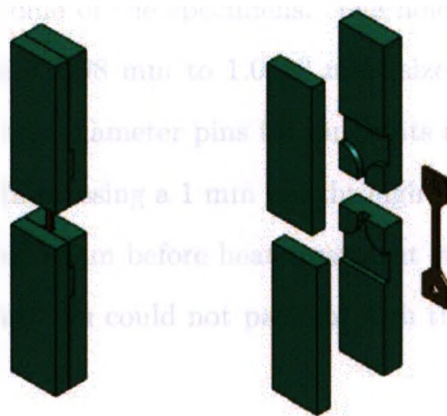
Tensile specimen and jig for material testing. Left: Assembled. Right: Exploded.
